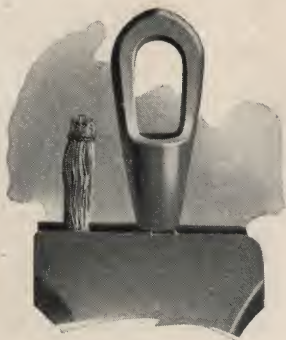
After having been cleaned, the ends of the wires are drawn together with a piece of seizing wire so that they will be reduced in size sufficiently that the wire rope socket may be placed thereon. Be sure that the socket lines with the axis of the rope.
